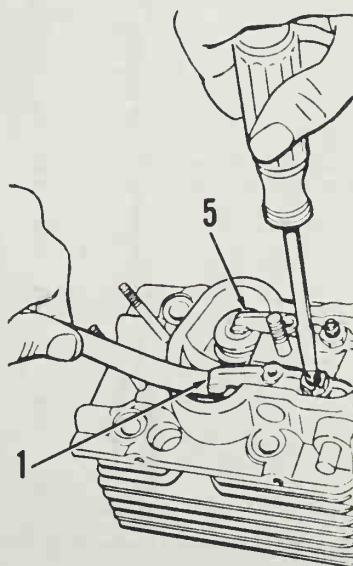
Valve tappet gap should be 0.15 mm at exhaust rocker arm (1) and 0.10 mm at intake rocker arm (5).
